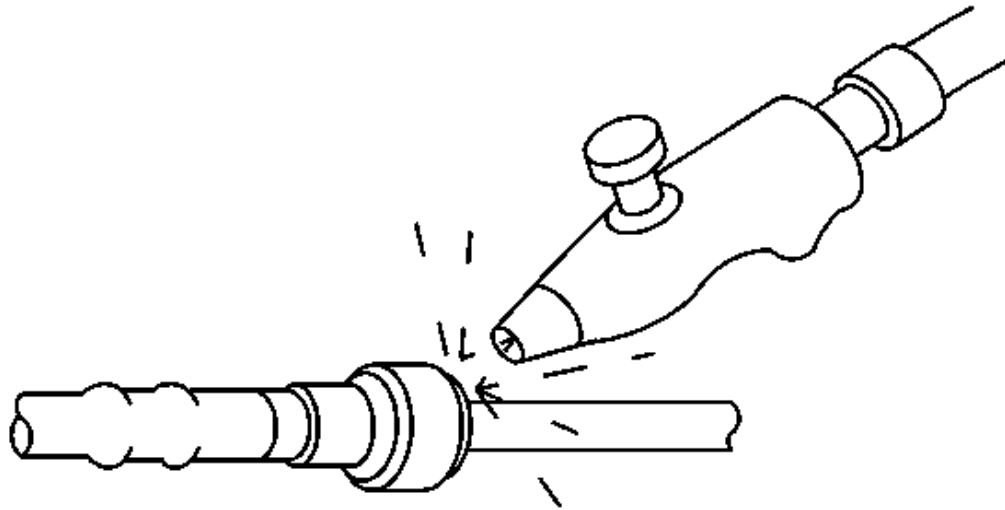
Blowing Dirt Out Of Fitting (Metal Collar)
